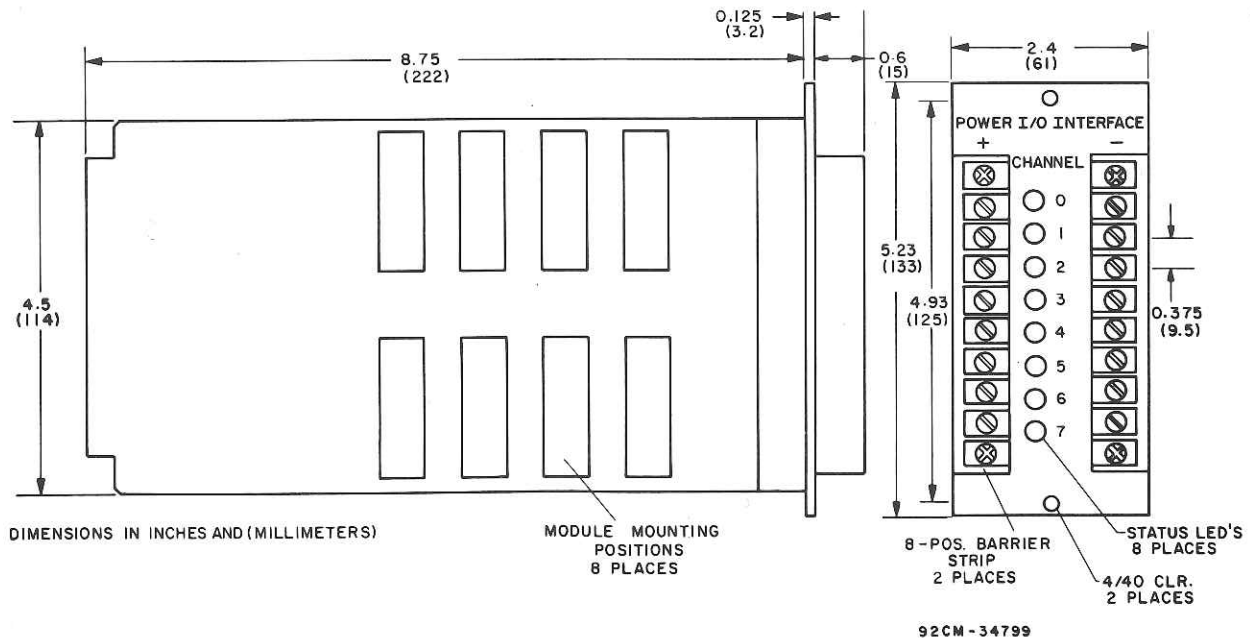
Dimensions of MSIM 20 Power I/O Interface.
